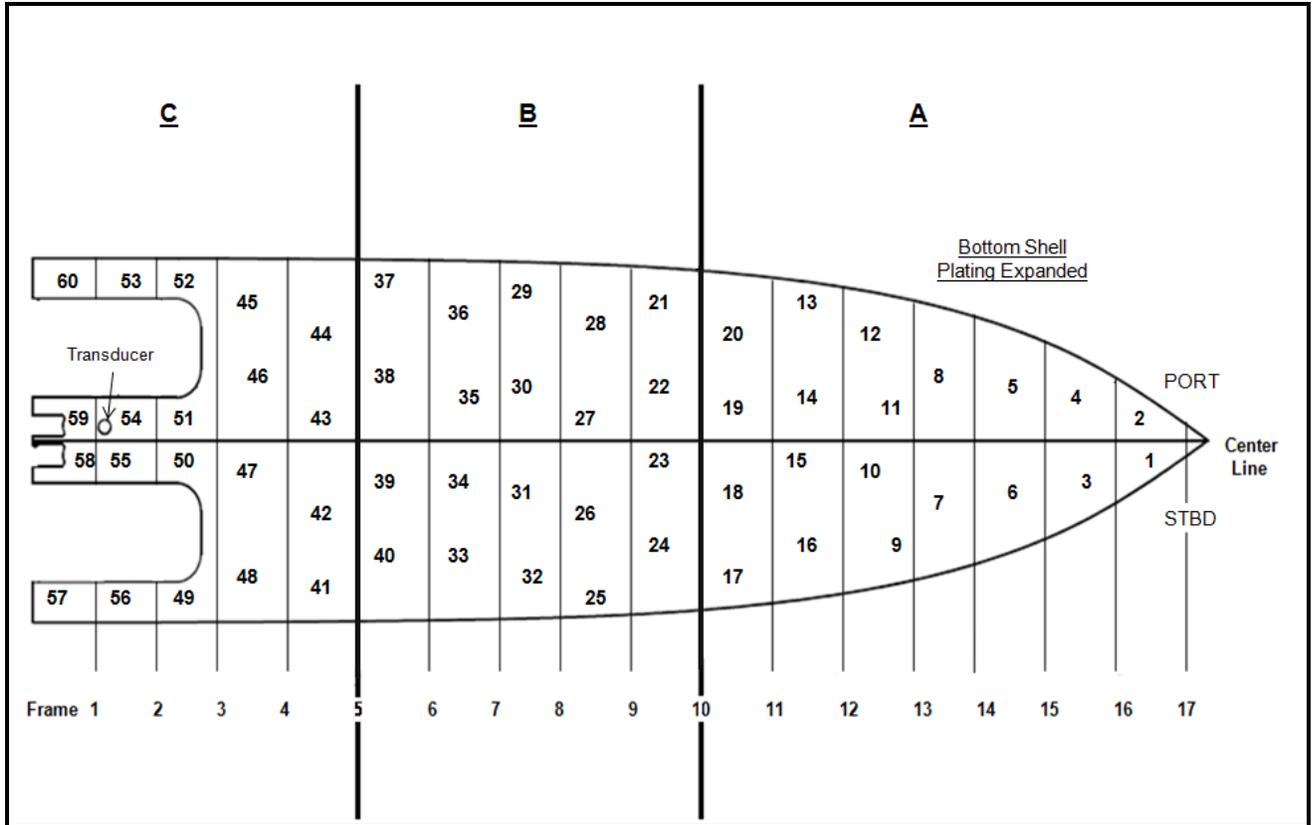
BOTTOM SHELL PLATING EXPANDED
